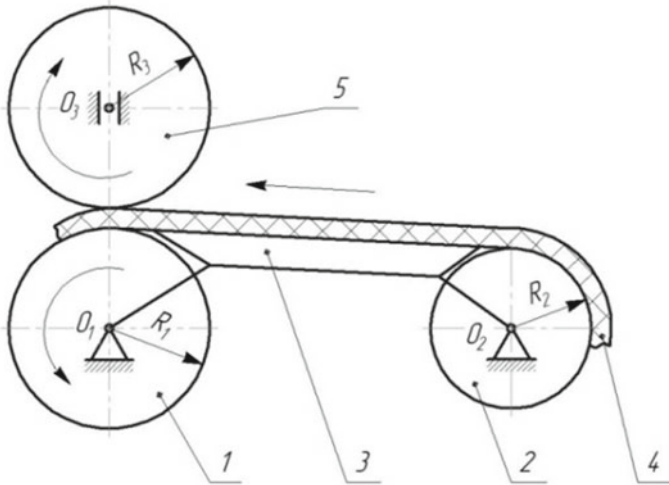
Scheme of the conveying mechanism with a free upper working roller. 1—drive shaft; 2—driven shaft; 3—spreading table; 4—semi-finished leather product, 5—freely rotating shaft
